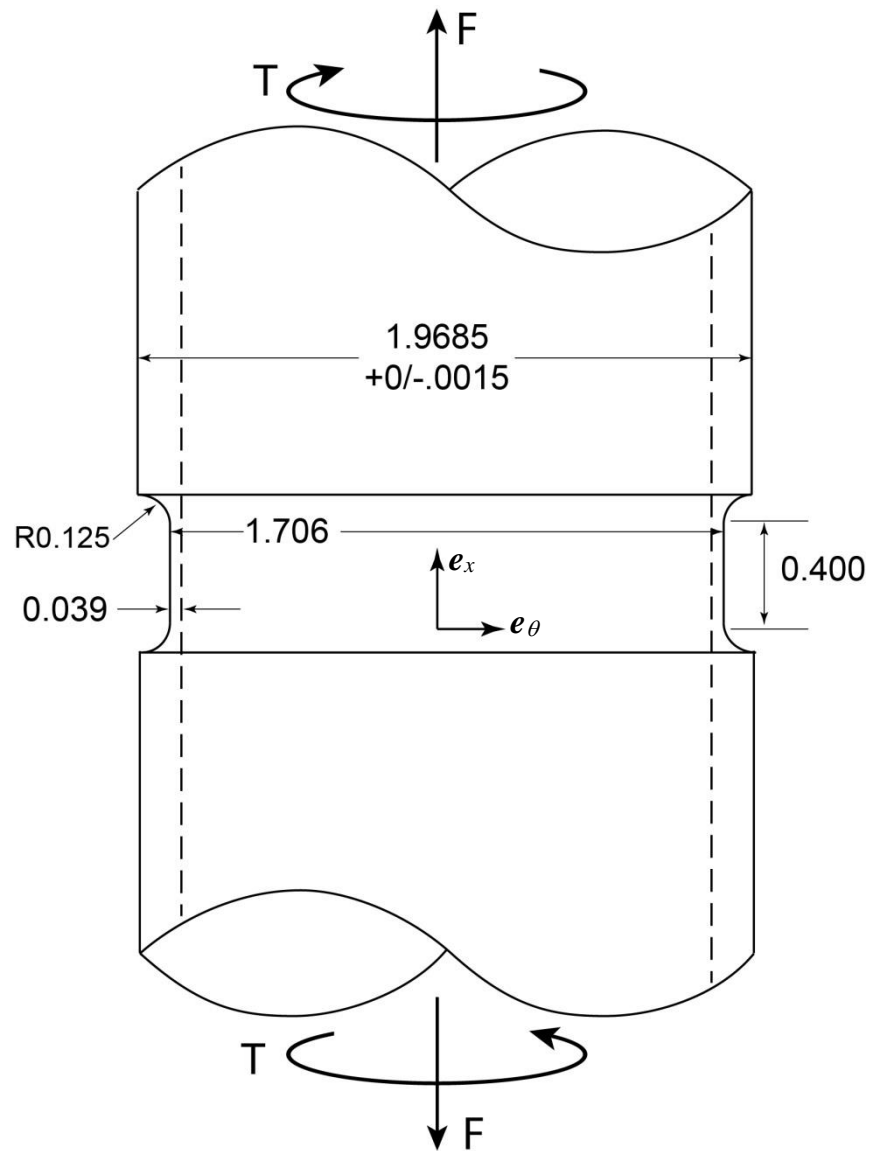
Schematic of the machined tension-torsion specimen.
